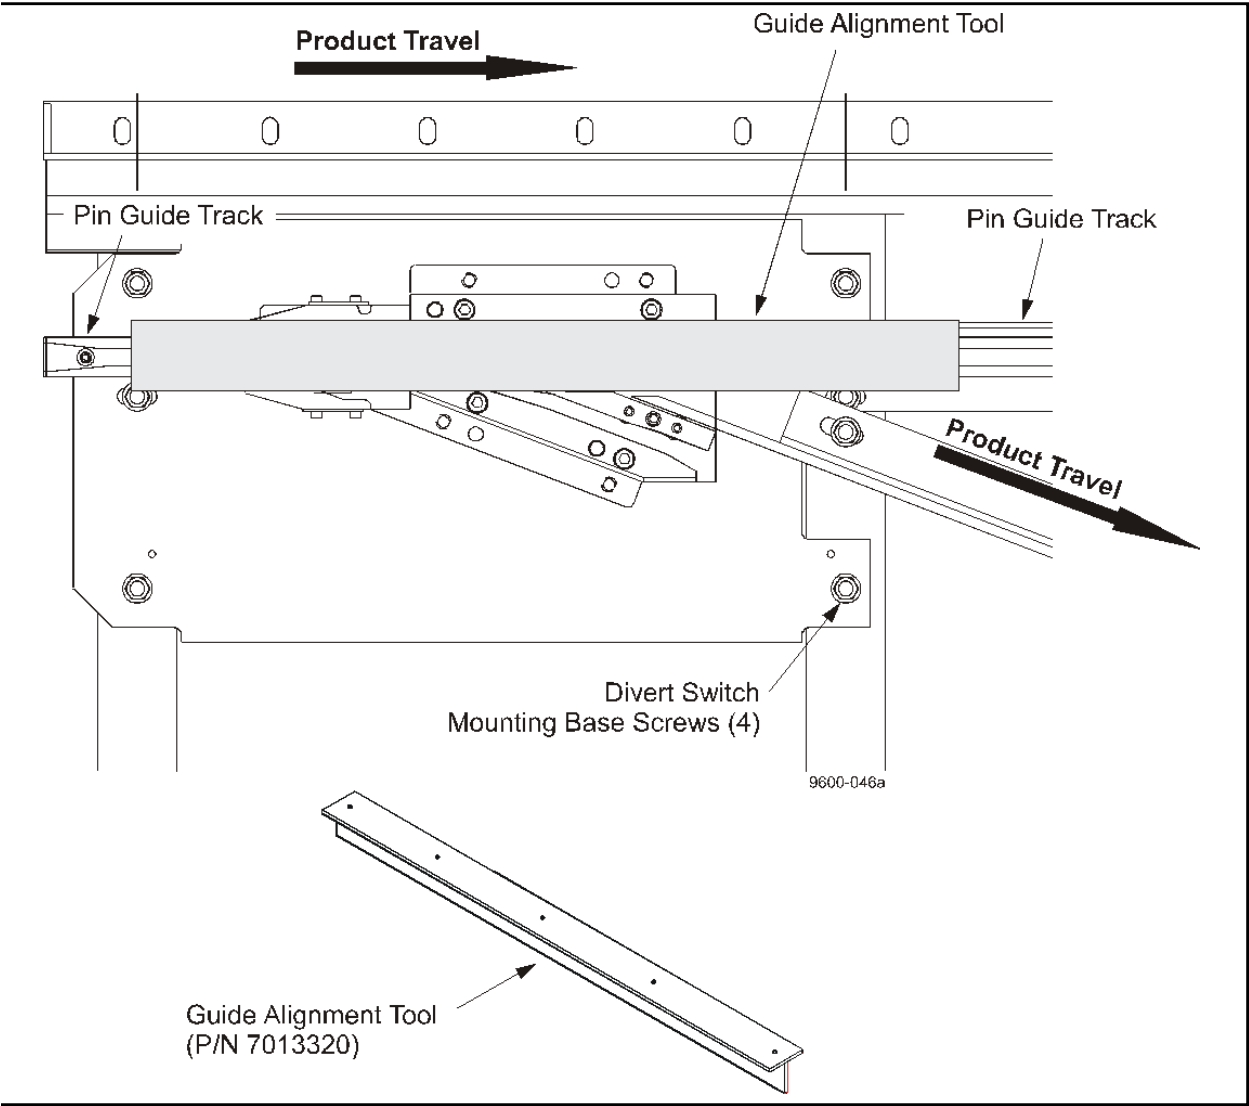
19 Checking Divert Switch-to-Pin Guide Track Alignment
